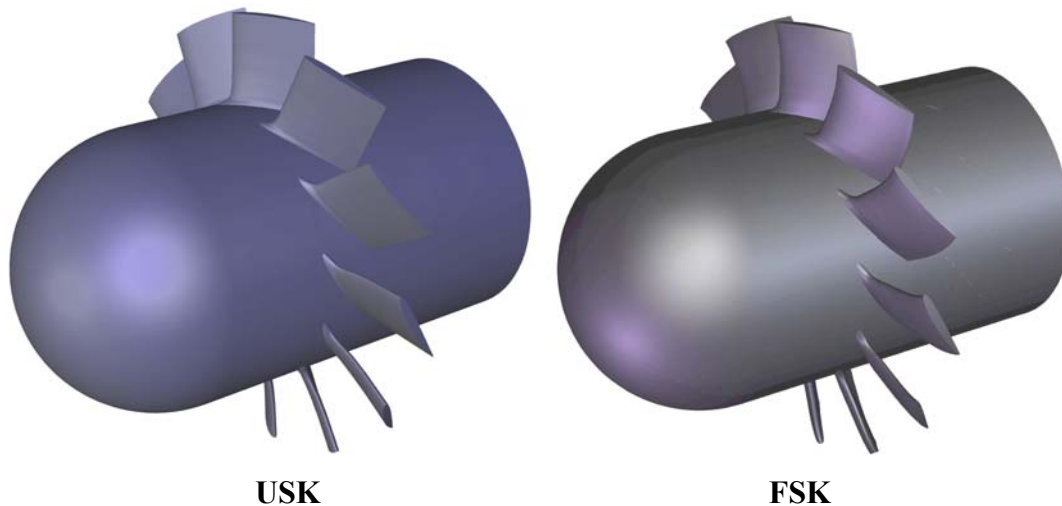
Isometric views of rotors with unskewed and forward-skewed blades
